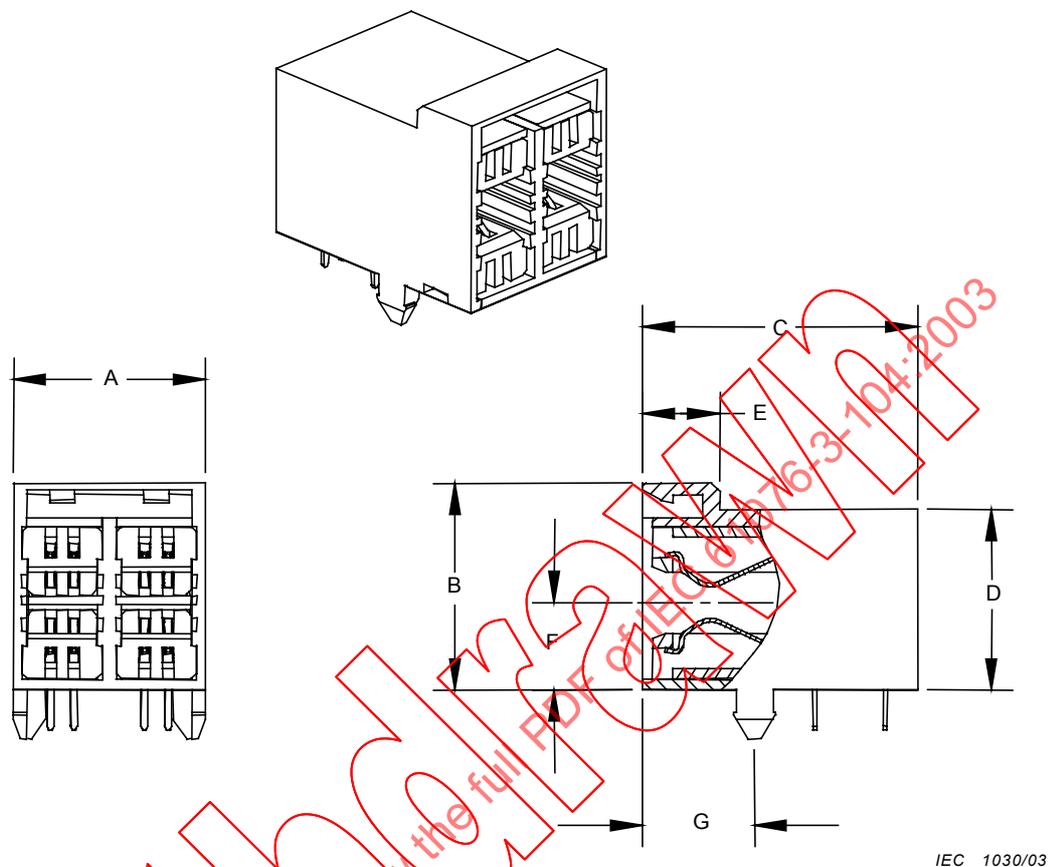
Variant 02 printed circuit board (PCB) outlet drawing
